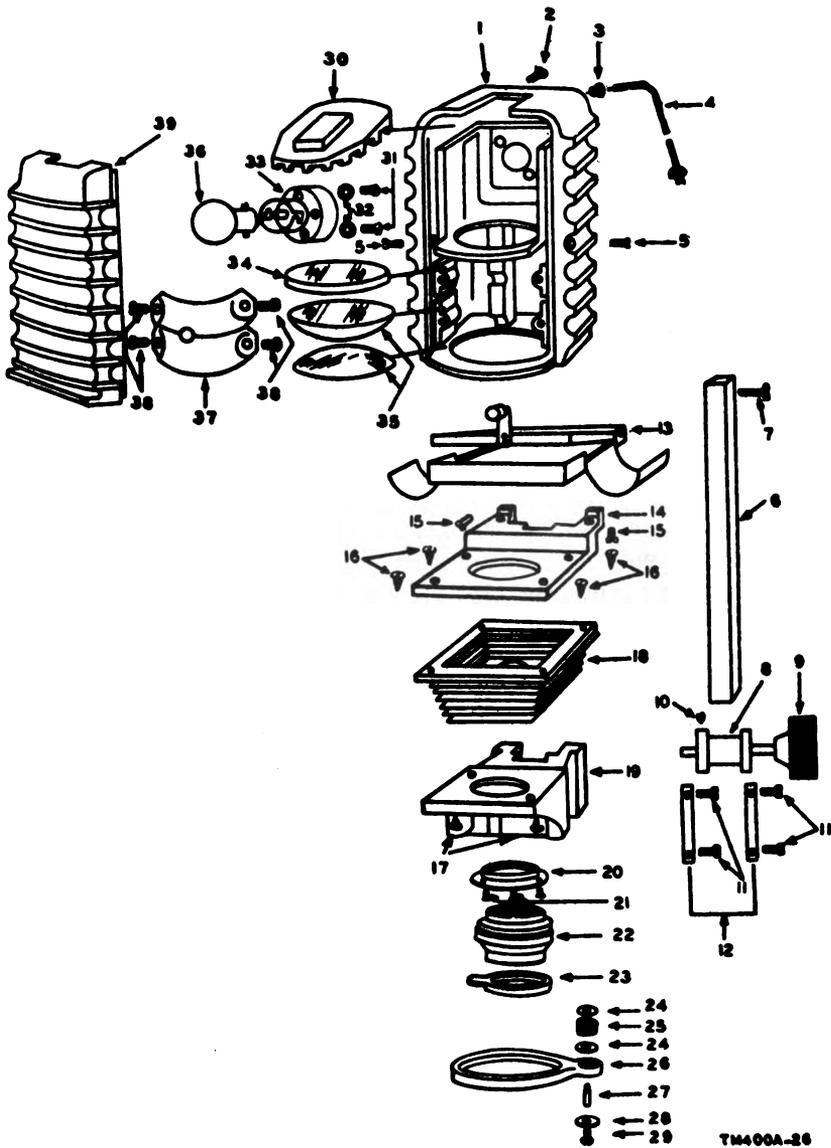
Photographic Projection Printer EN-11(1), exploded view.
